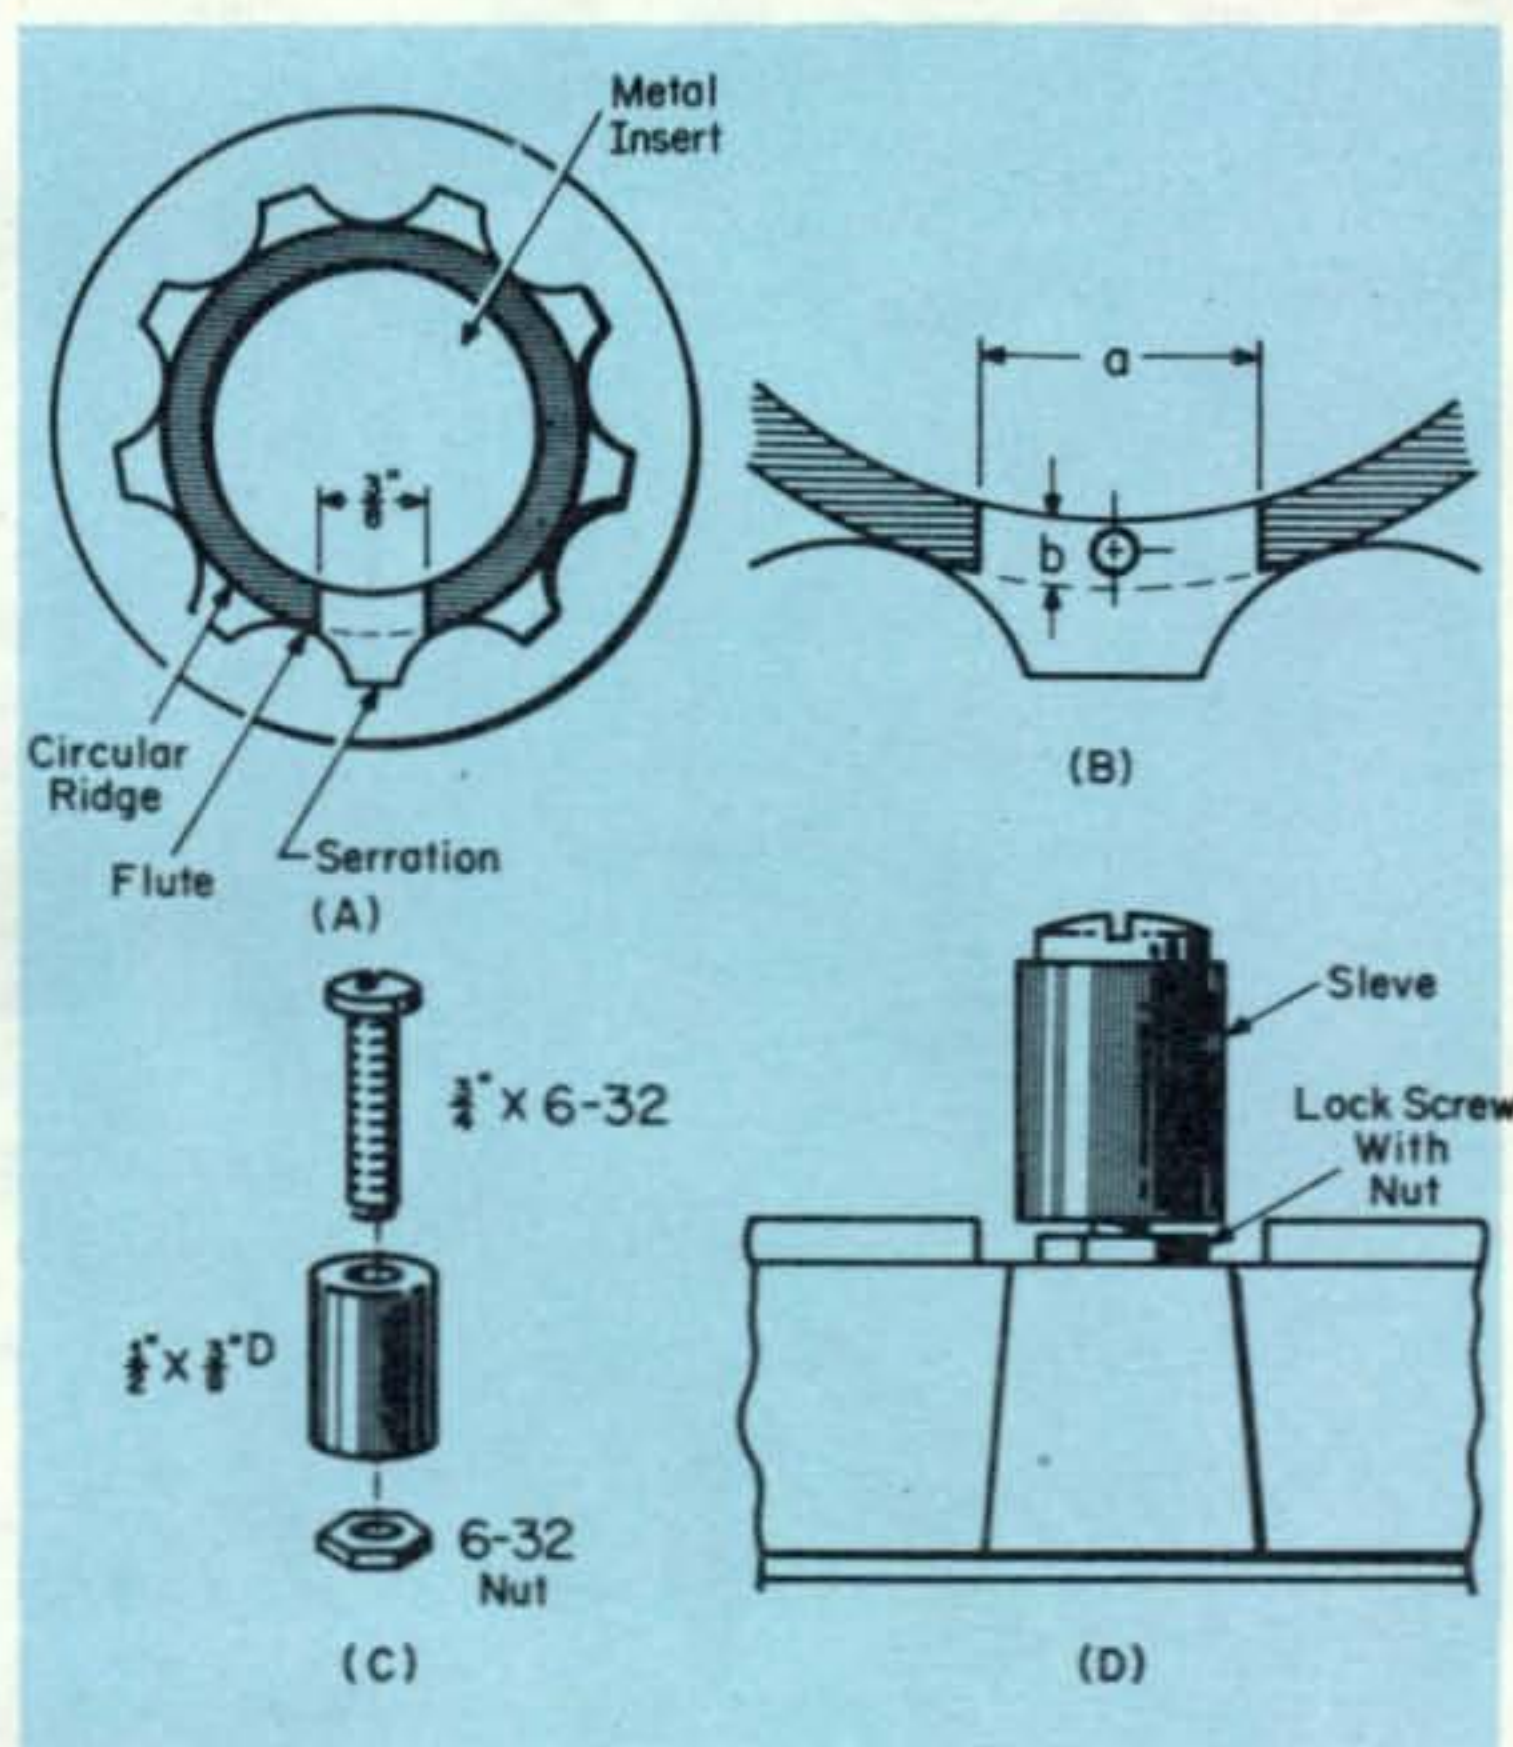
Mechanical details for modifying Heathkit SB-series tuning knob. A—File $\frac{3}{8}$ " wide slot in circular ridge, making it flush with the top of the serration and the metal insert. B—Drill #36 hole exactly centered between dimension a and dimension b . Thread hole with 6/32 tap. C—Pass screw through sleeve and thread nut on screw almost up to the sleeve. D—Thread screw into the hole and lock with nut as described in text.
